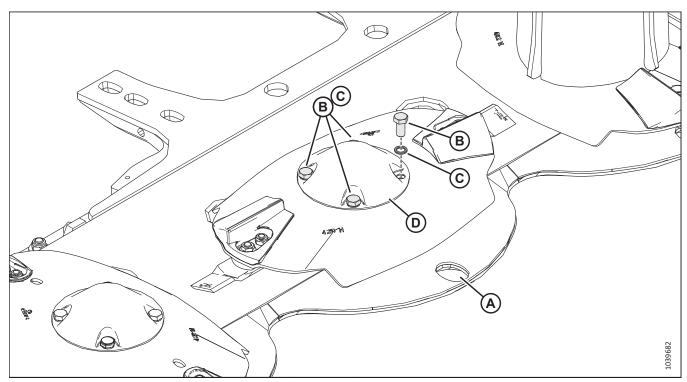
Cutterbar Disc Cap Hardware Removal – Disc 9 Shown
